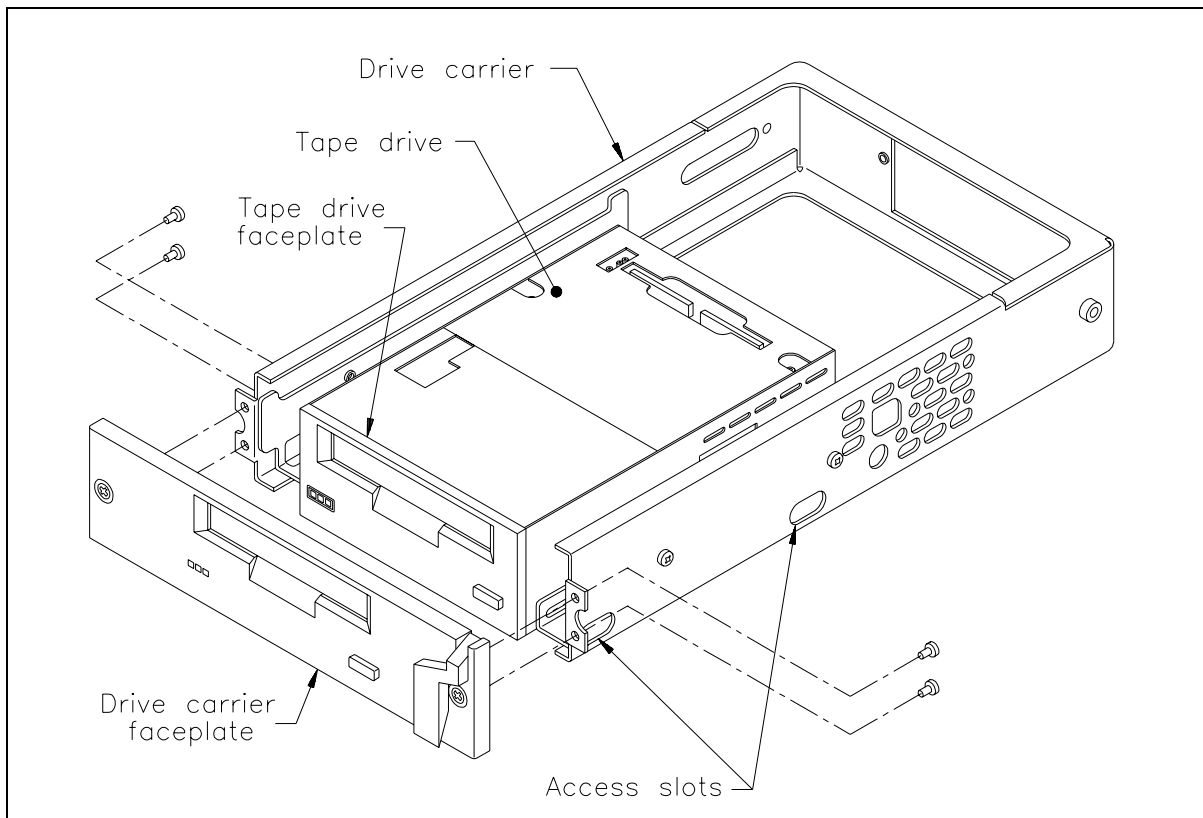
Installing the drive carrier faceplate for 4mm tape drive
